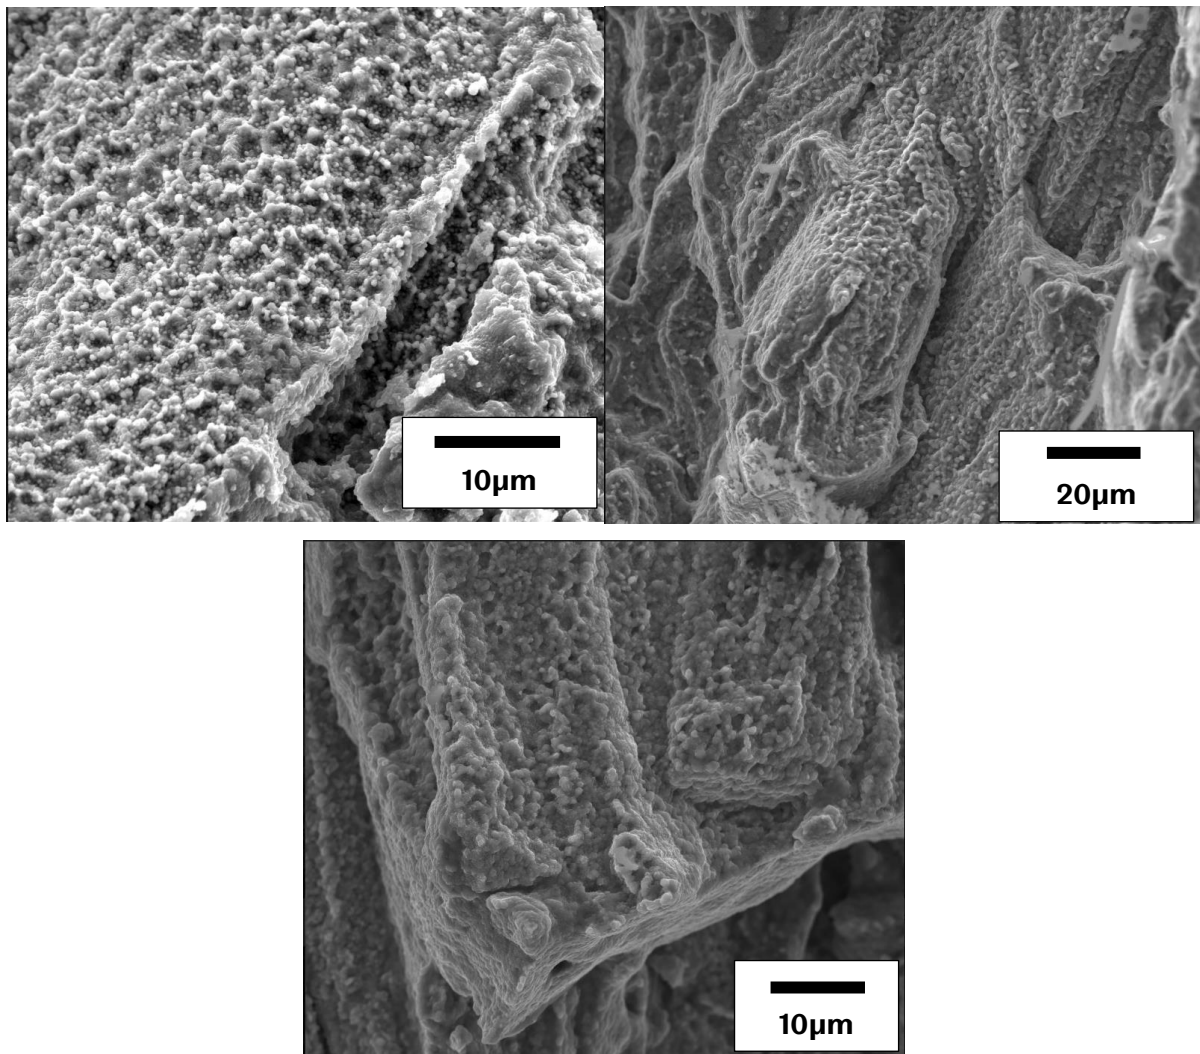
Micrographs showing the fracture surfaces of the stress rupture tests. (a)HED7, (b) ABED7 (c) CED7. All samples display ductile fracture, characterised by the appearance of dimples.
